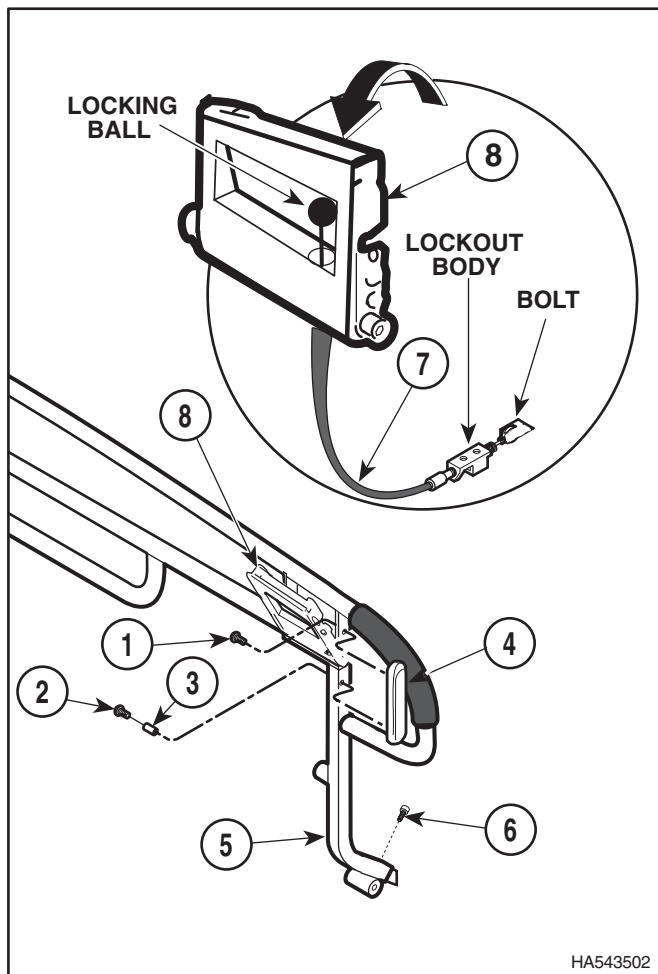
550 and 555 Siderail Latch Assembly Removal / Installation
